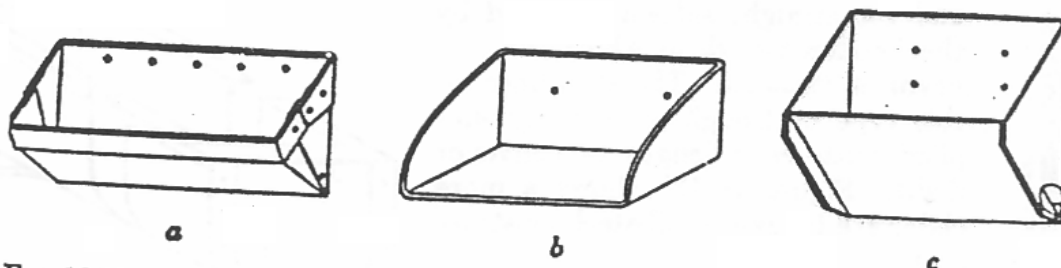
Elevator buckets: (a) Minneapolis type; (b) buckets for wet or sticky materials; (c) stamped-steel bucket for crushed rock.
